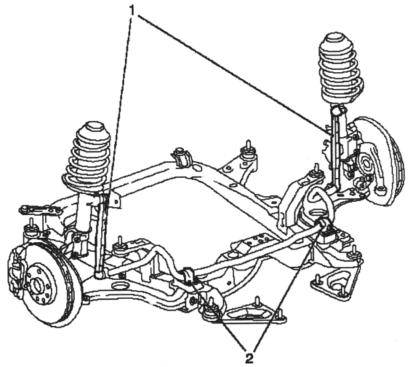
Stabilizer / swivel Lever: 1 - turning the lever, 2 - Brackets
